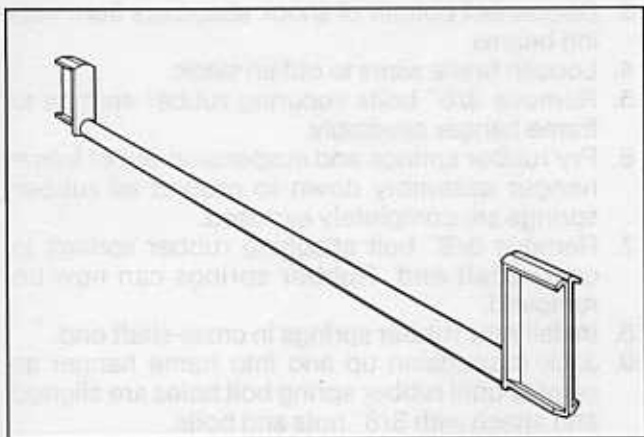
MOR/ryde Tandem Cross-Shaft Assembly
